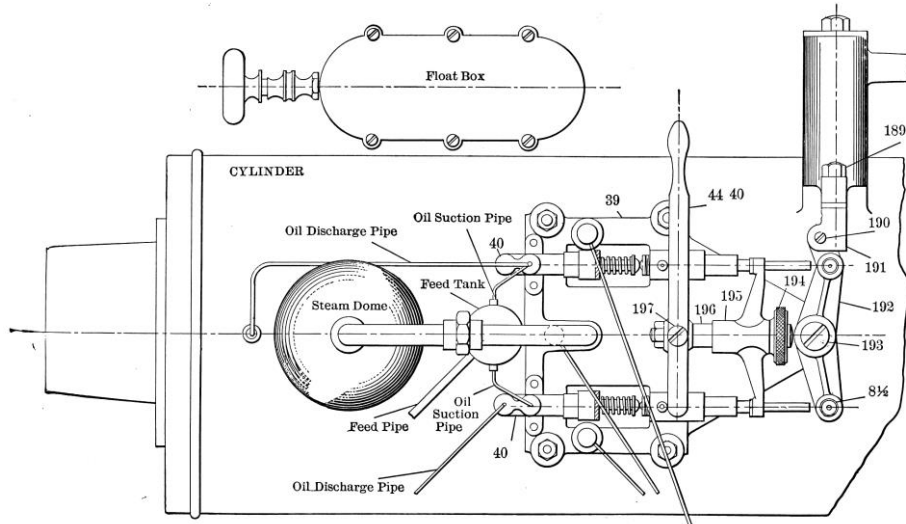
Top View of Pump Mechanism and Oil Distribution of the Mietz & Weiss 80 H. P. Horizontal Twin-Cylinder Oil Engine.
